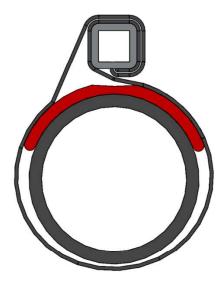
Wrench Adapter Assembly Configuration for Re-Entrant Tip Replacement
